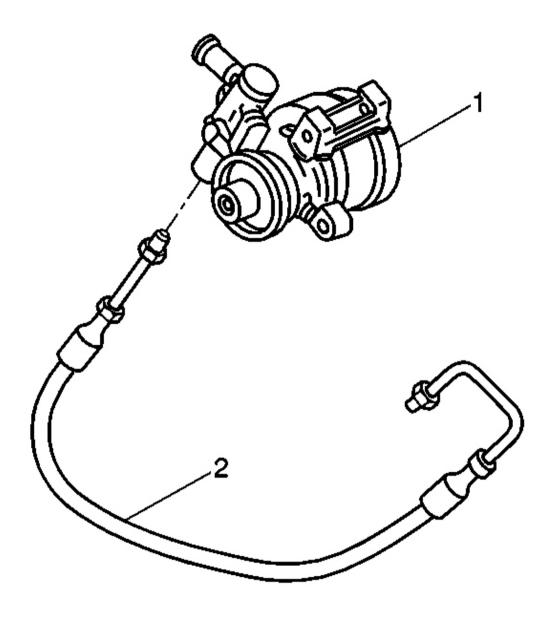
Power Steering Pump & Power Steering Pressure Hose Courtesy of GENERAL MOTORS CORP.
